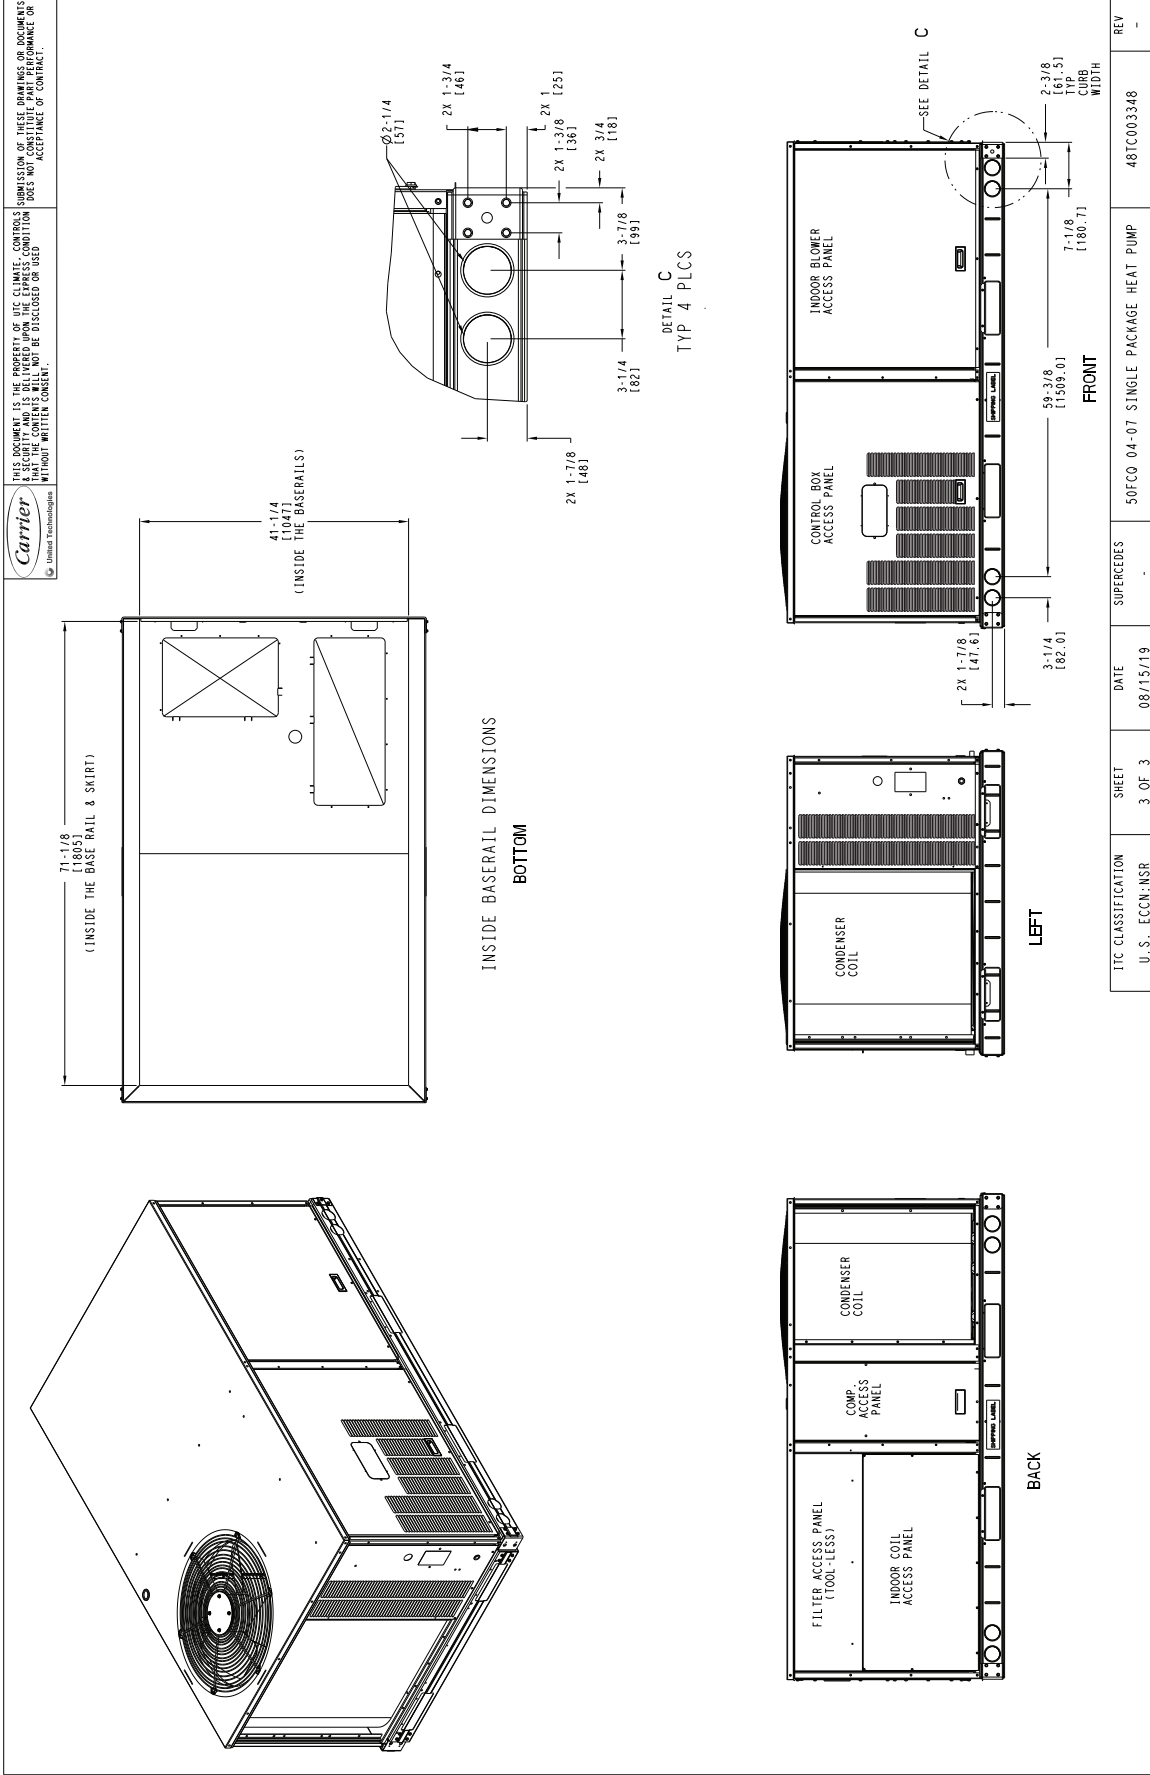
50FCQ*04-07 Dimensional Drawing (cont)
